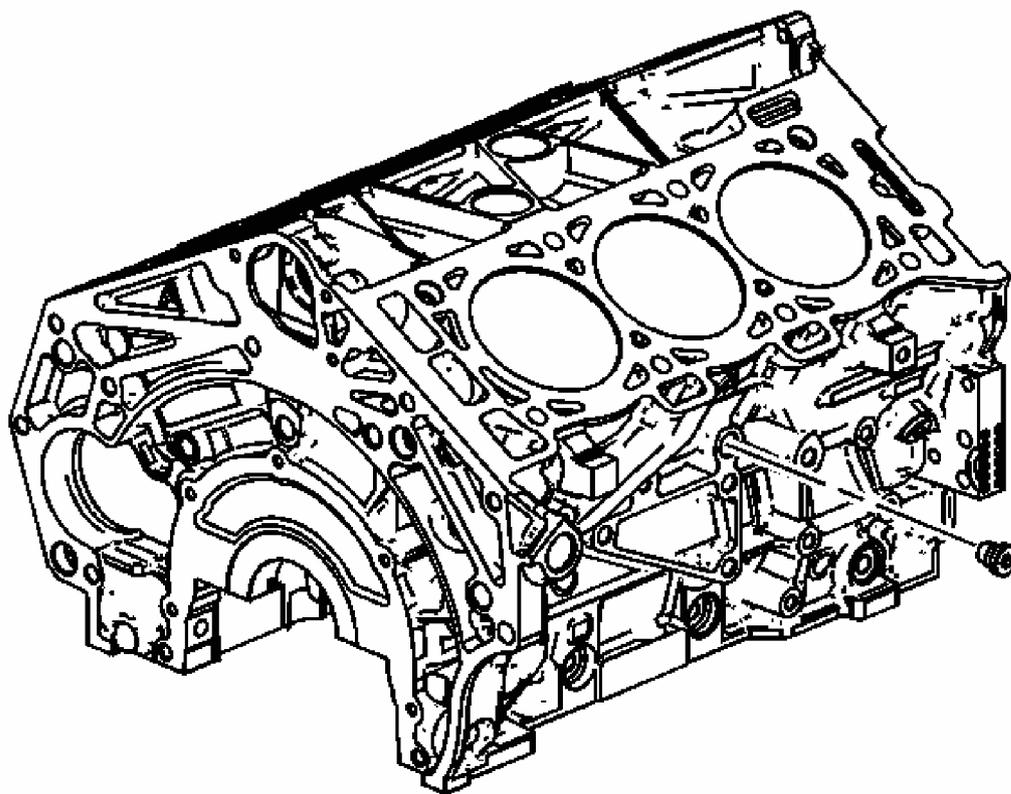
Locating M14 Right Side Coolant Drain Threaded Plug
